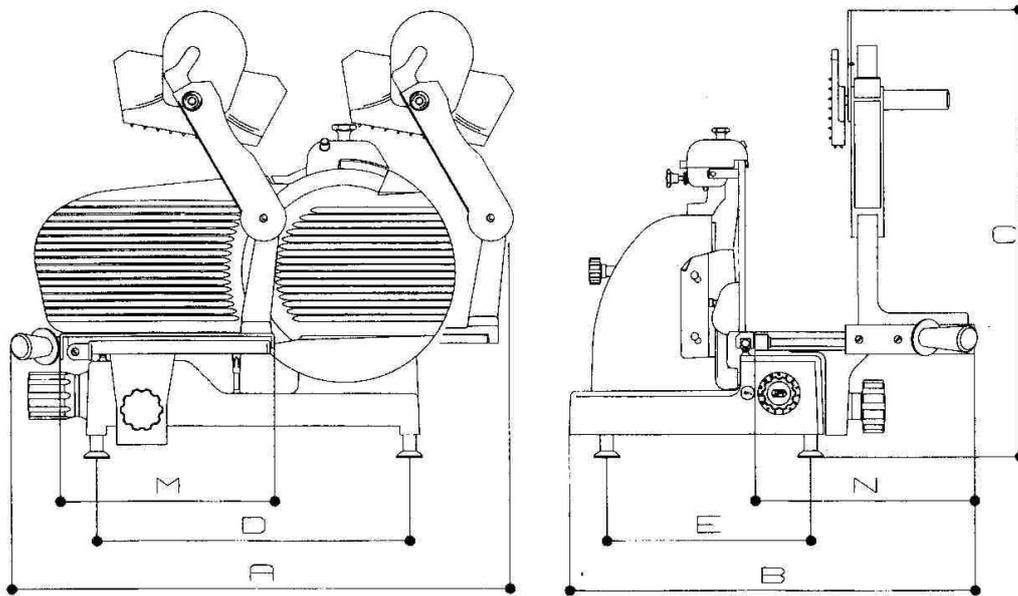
Dimensional drawings of vertical slicer with ham carriage
